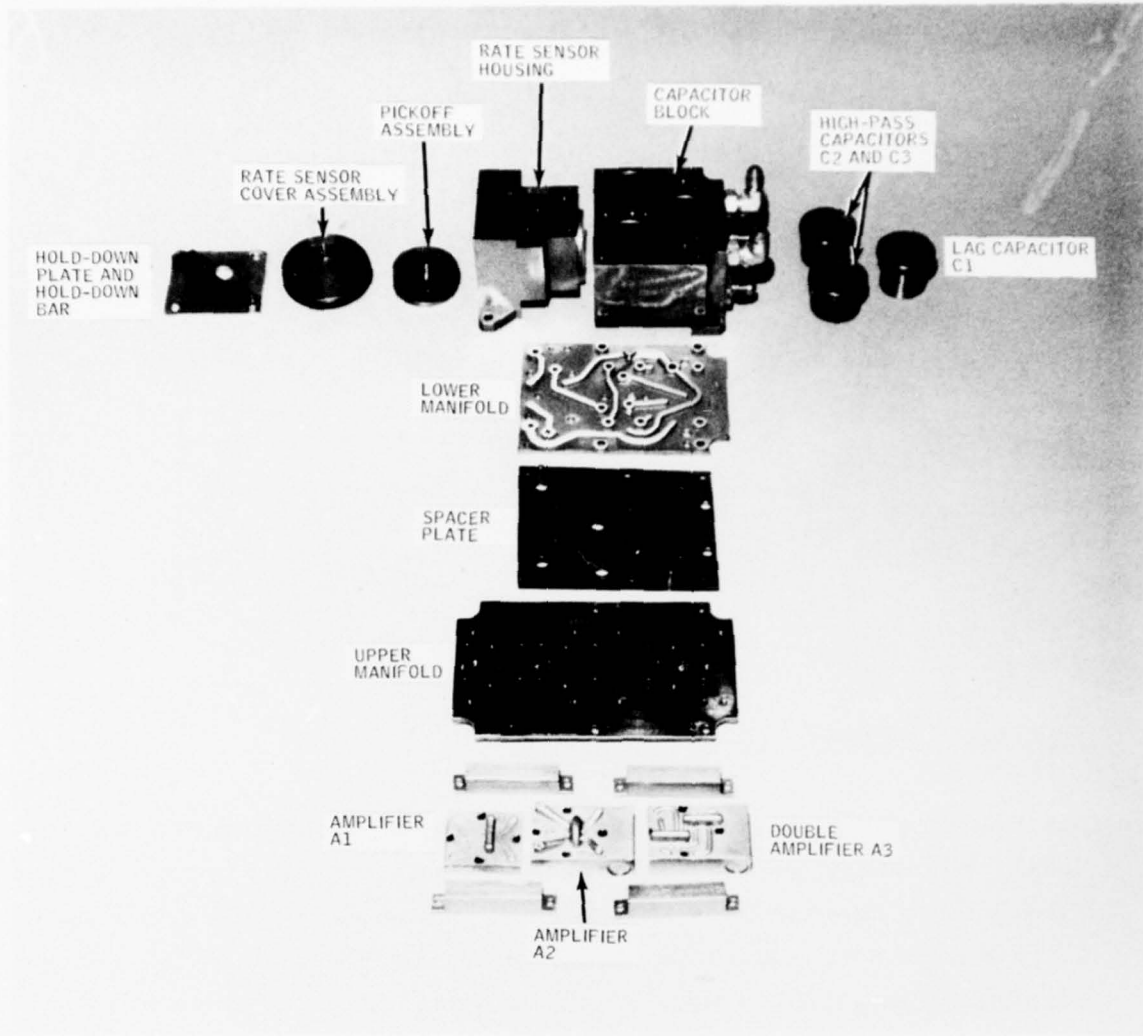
YG1136A - Roll Axis Controller Exploded View.
